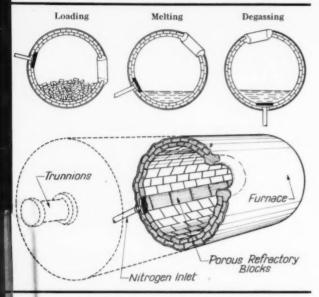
Setup Proposed for Degassing a Rotary Furnace
